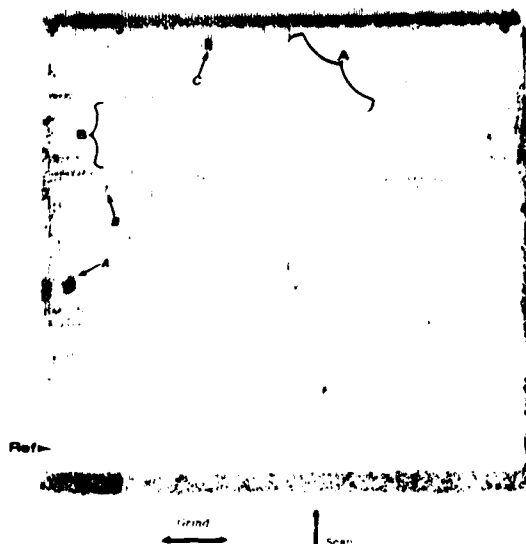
C-Scan Recording of 45 MHz, 18° Surface Wave Inspection of Top Surface of Billet of Ceralloy 147A HPSN After Machining (Scan Perpendicular to Grinding Direction).
